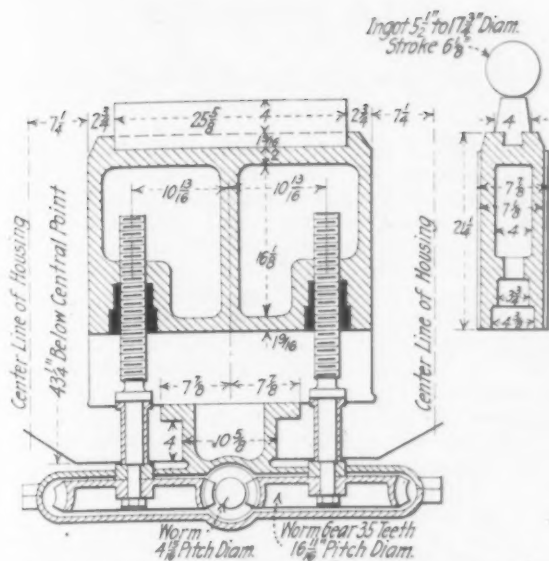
Lower Guide for Ingots Between the Rolls of a 22-in. Oblique Rolling Mill
